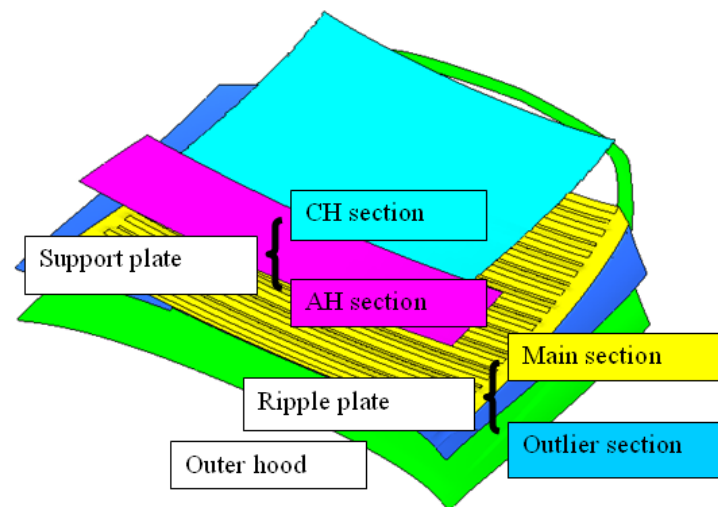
Exploded view of bonnet design (upside down view) (Liu et al., 2015)
